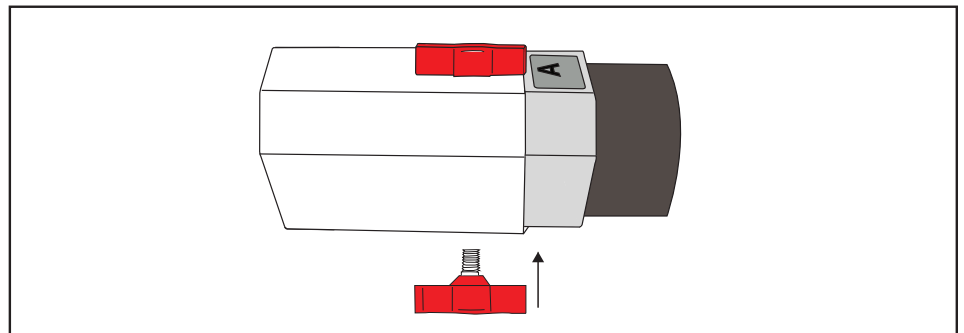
Screw Short Red Arm Screw into Bottom Boom Arm Connector
